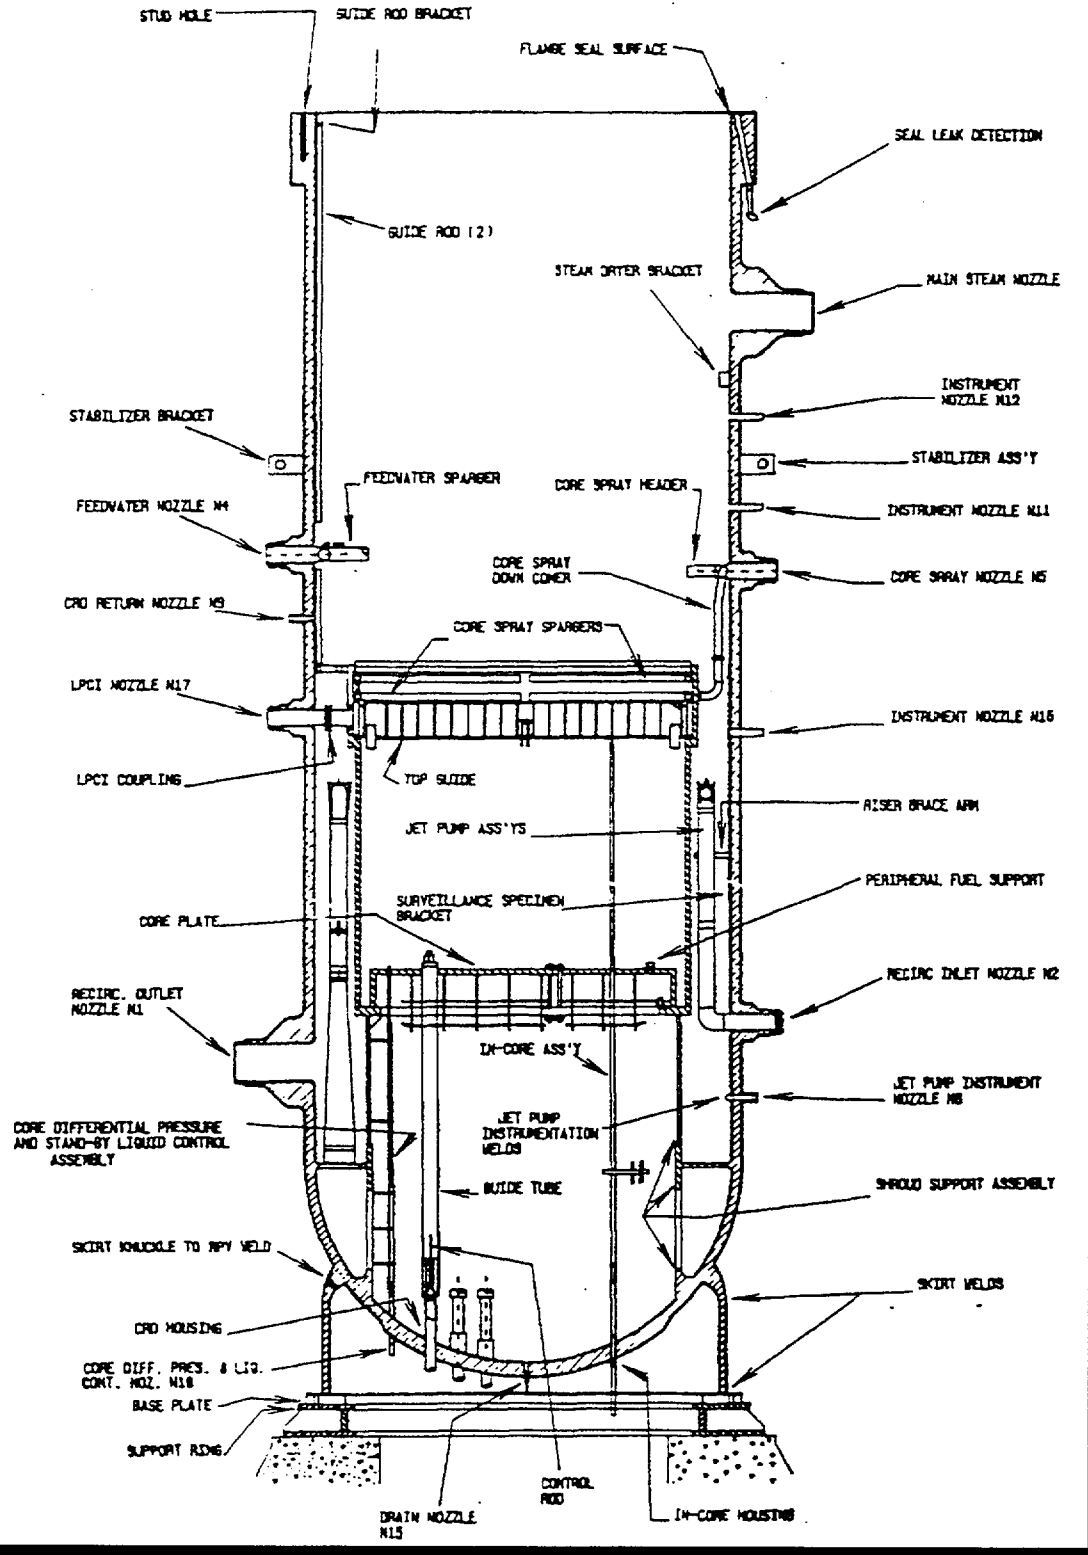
Overview of Vessel Nozzle and Attachment Weld Locations [2-2]
